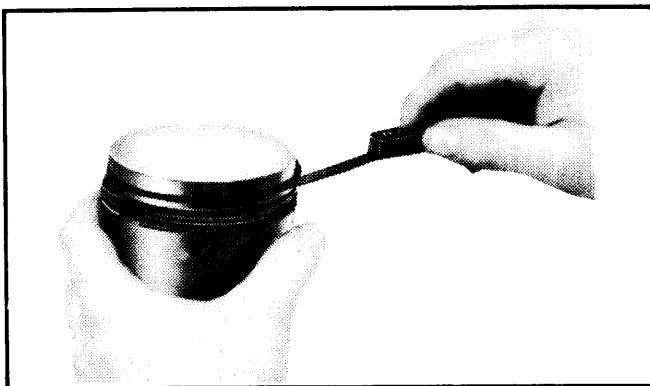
Using a Feeler Gauge to Measure Ring Clearance
